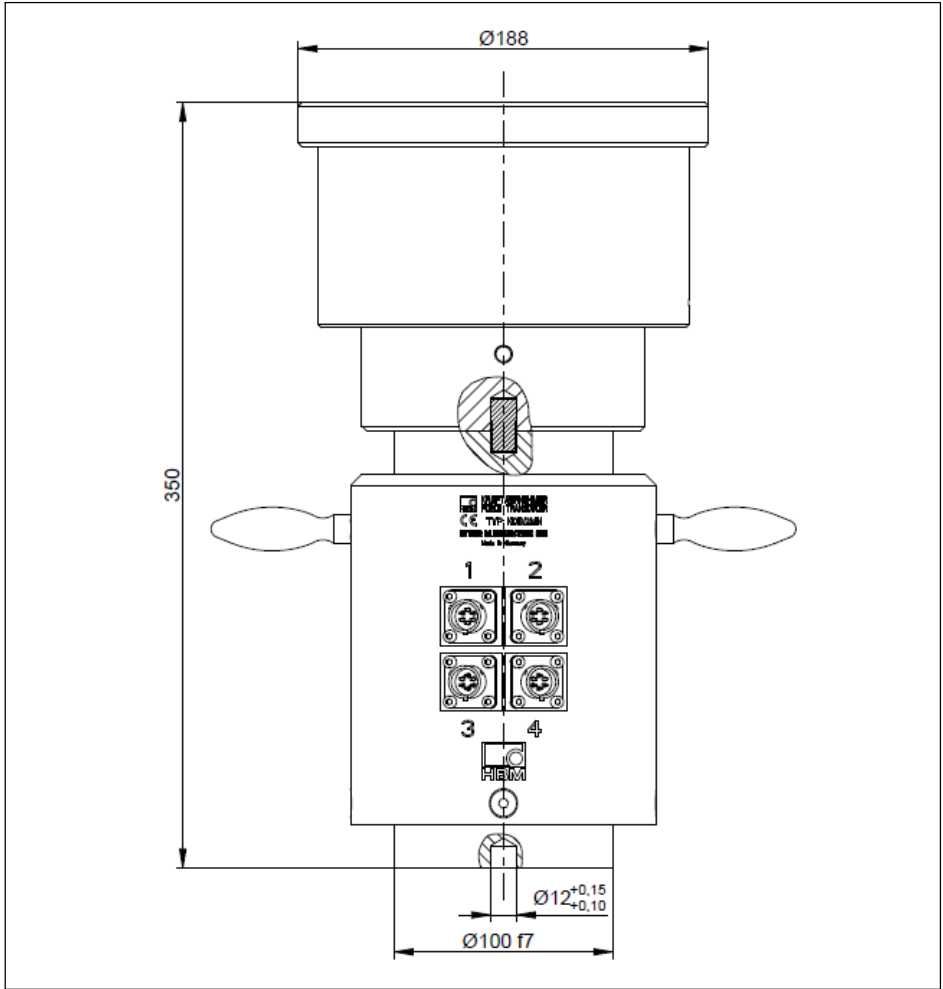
Dimensions for use with domed load application button and thrust piece
